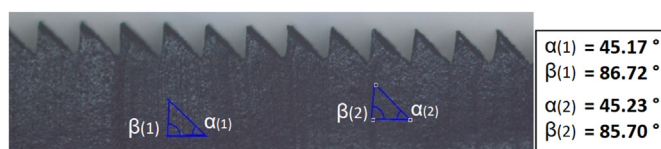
Cross-section of a silicone molding of part of the finished saw-tooth structure on the role.
